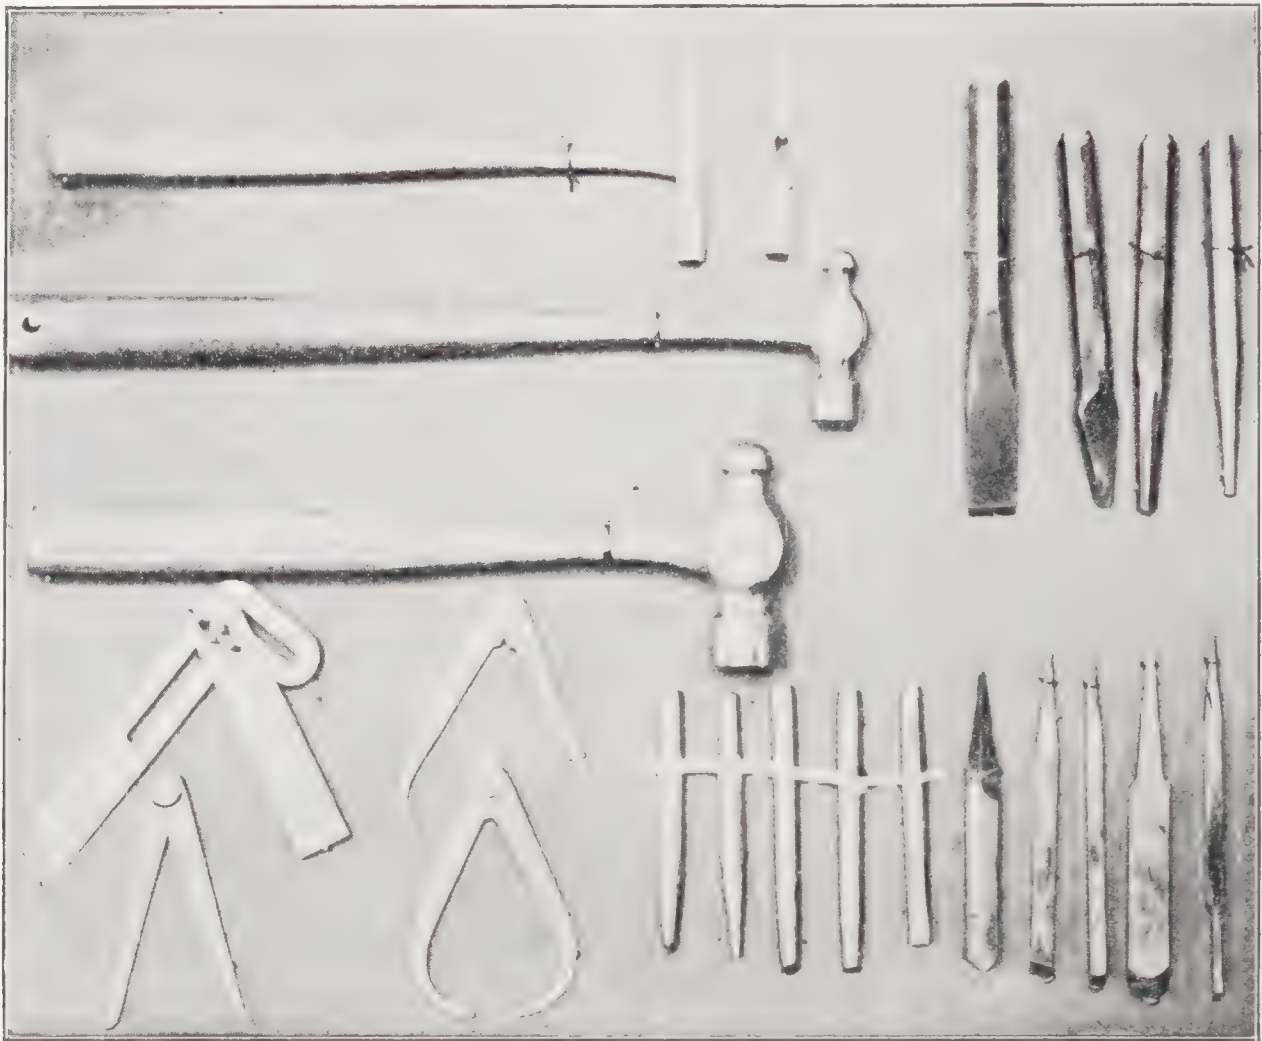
FIG. II. BENCH EQUIPMENT AND TOOLS FOR METAL-TURNING.
